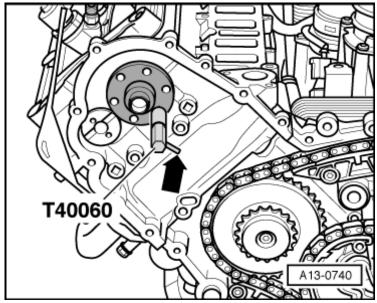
Identifying Check Of Camshafts For Both Cylinder Heads In TDC Position And Adjustment Pin T40060
